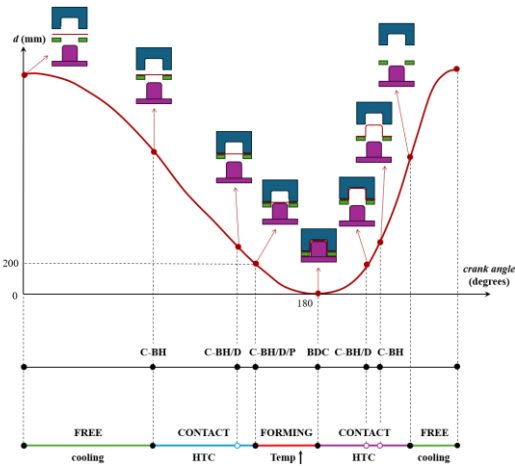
Stamping die working phases in where the contact with the sheet is defined as simple contact, forming phase and after forming contact.
